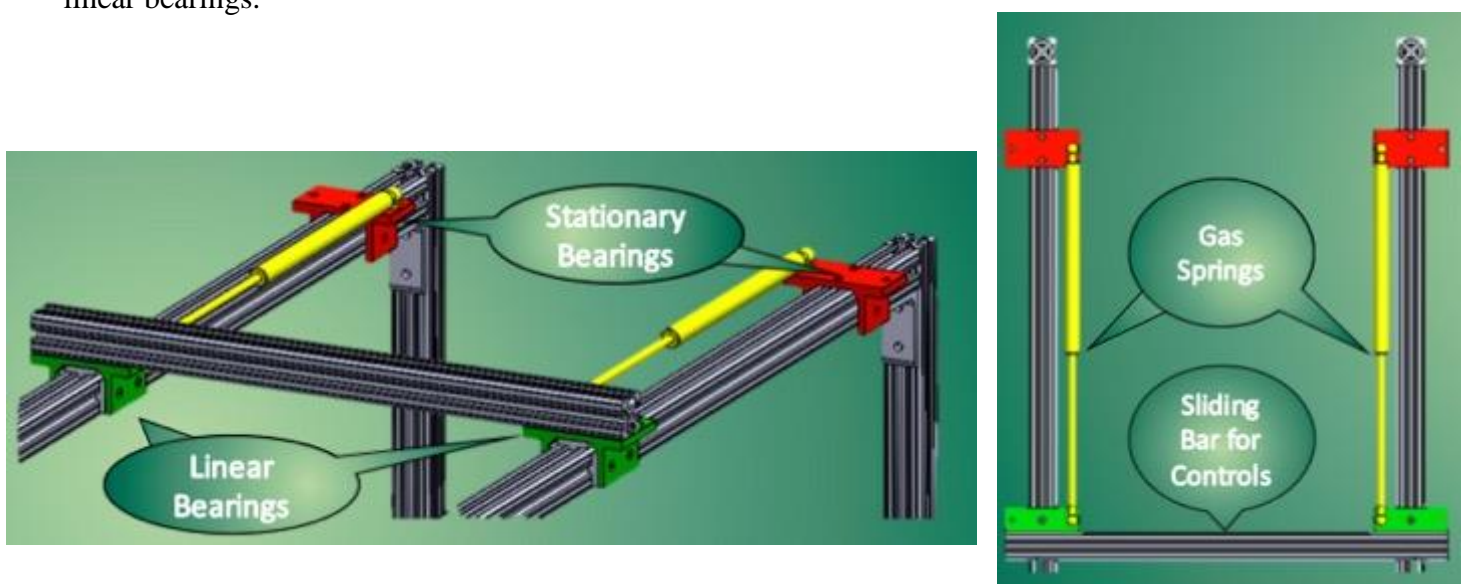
Detailed design of the sliding arm configuration with linear speed limiters.
